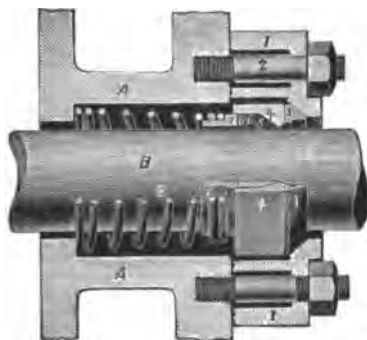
Metallic Piston-Rod Packing. Scale  $\frac{1}{8}$  in.—1 in.
